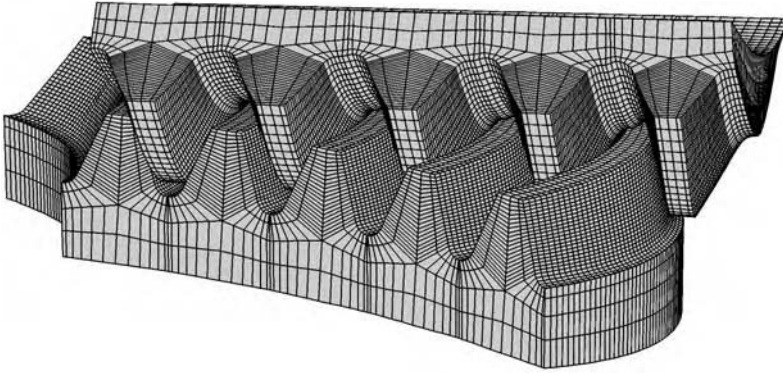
Finite element model of a whole spiral bevel gear drive.
